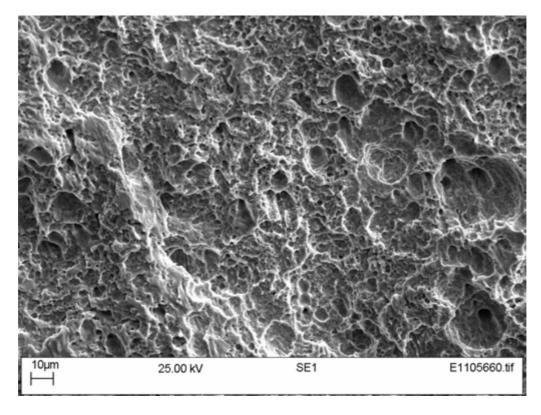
SEM fractograph, showing detail of figure 27 and fractography consistent with fatigue cracking.
